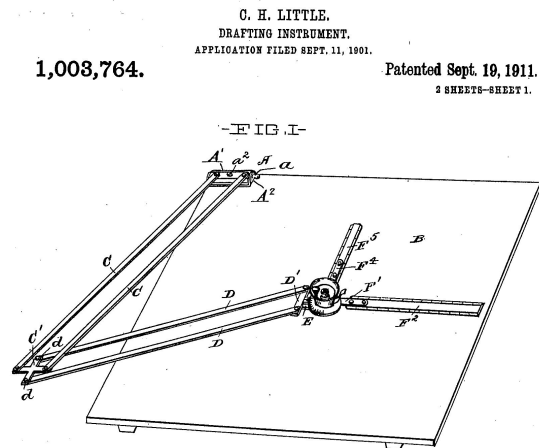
Little, Drafting Machine (1901)⁶⁰
